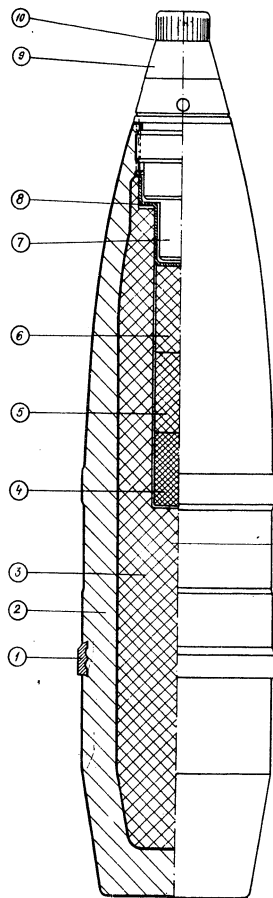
HIGH EXPLOSIVE SHELL »HE-OF-350«
